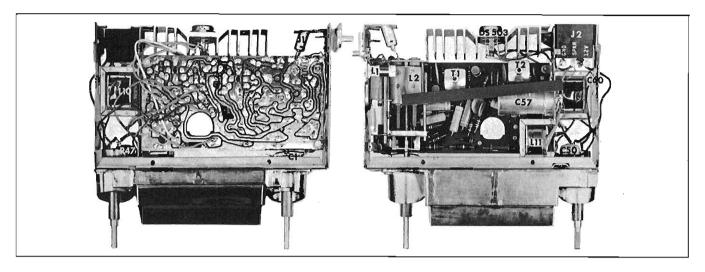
CHEVROLET PARTS LAYOUT CIRCUIT BOARD VIEW - 986096 RADIO
